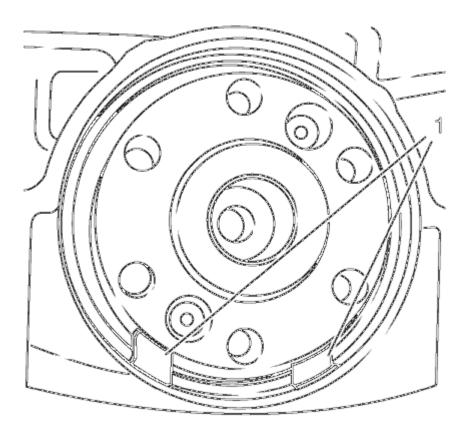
View of Timing Chain and Tensioner Courtesy of GENERAL MOTORS COMPANY
